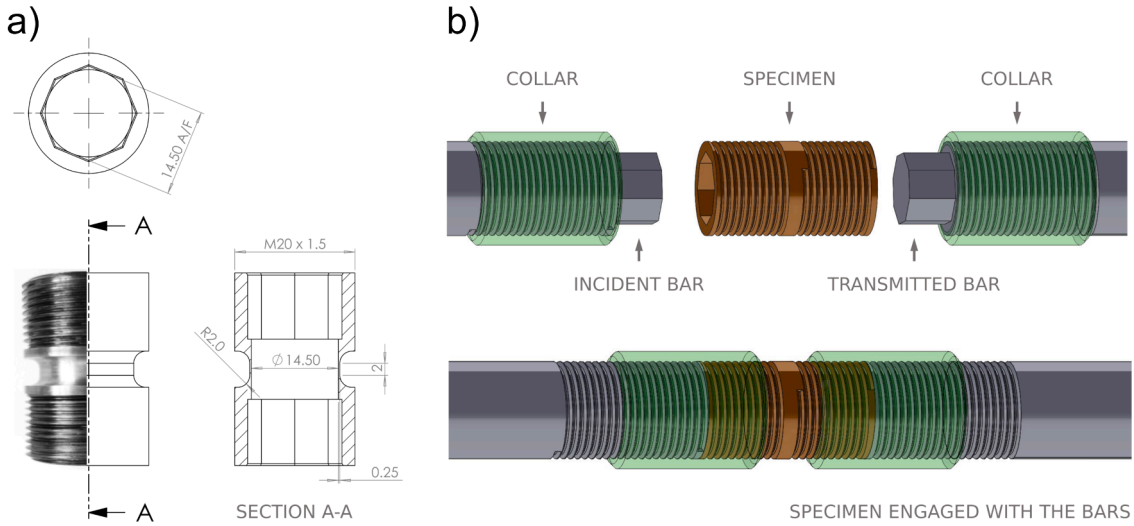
(a) Pure Cu specimen with geometry details (all dimensions in mm); (b), schematic of the connection between specimen and bars.
